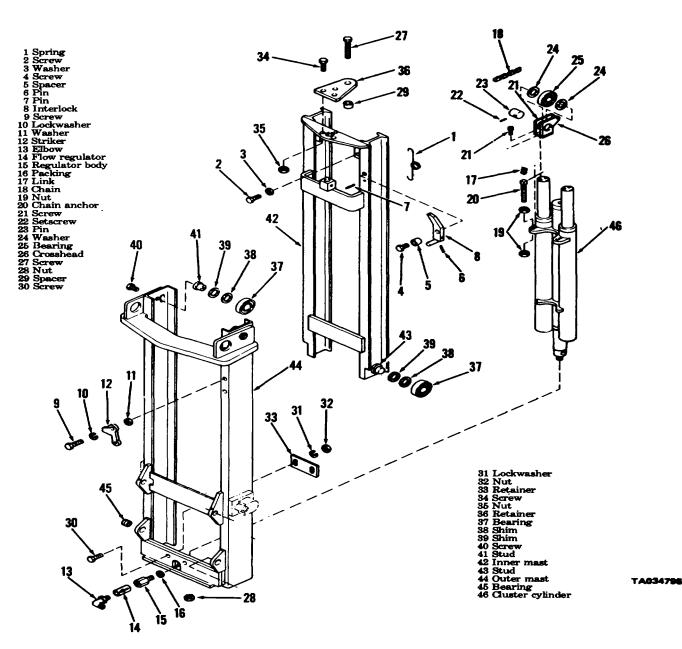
Mast assembly (model ACC40-24PS100), exploded view.
